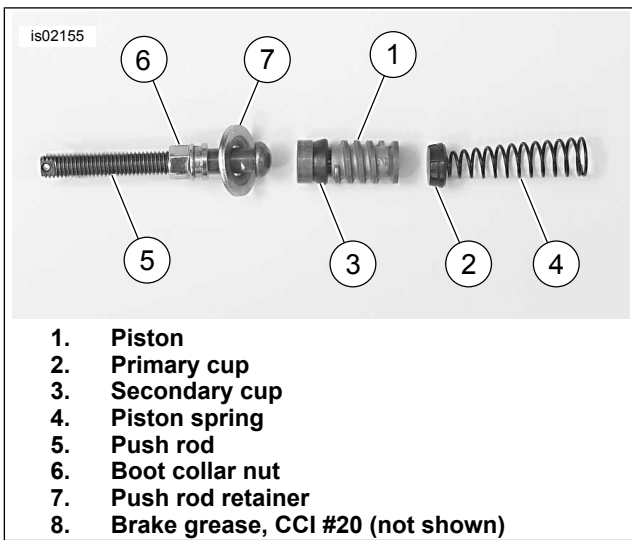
Rear Master Cylinder Piston, Push Rod, and Spring
